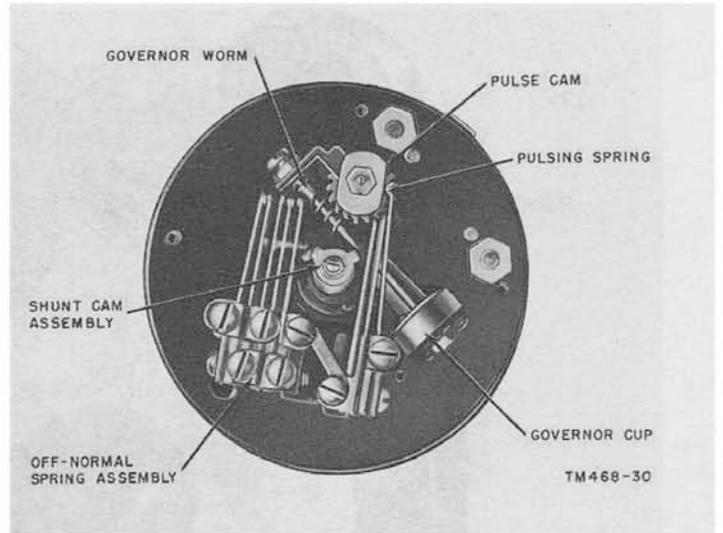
Dial TA-45/GT (Telephonics), rear view, showing location of parts.
